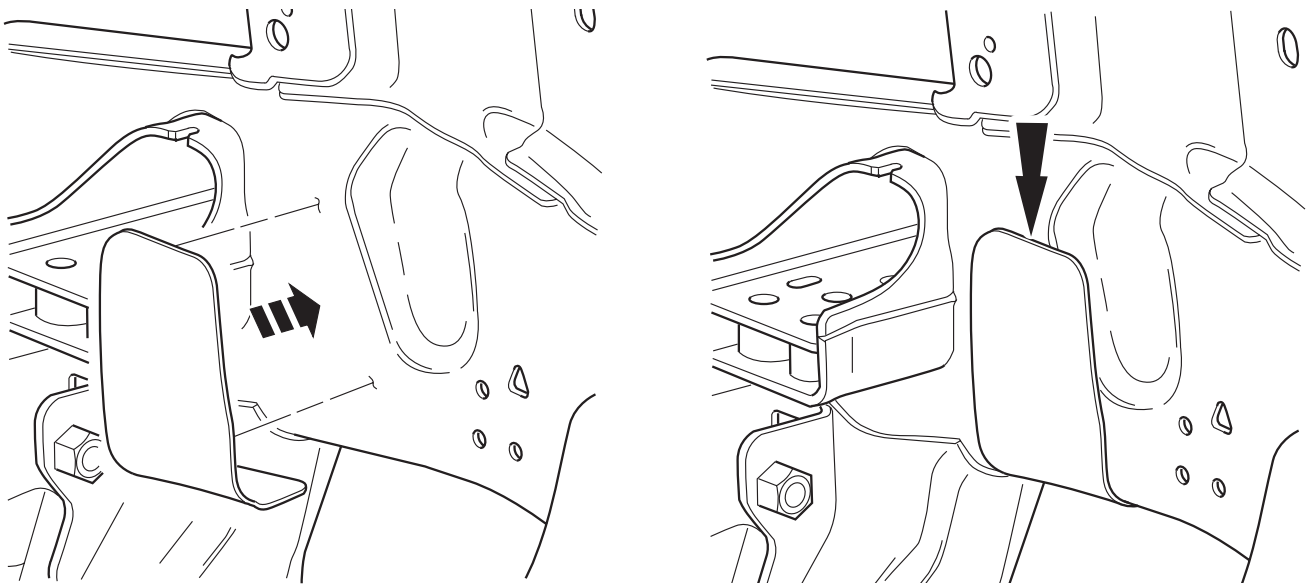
VIEW OF REINFORCEMENT PLATE IN POSITION ON THE FRAME RAIL
